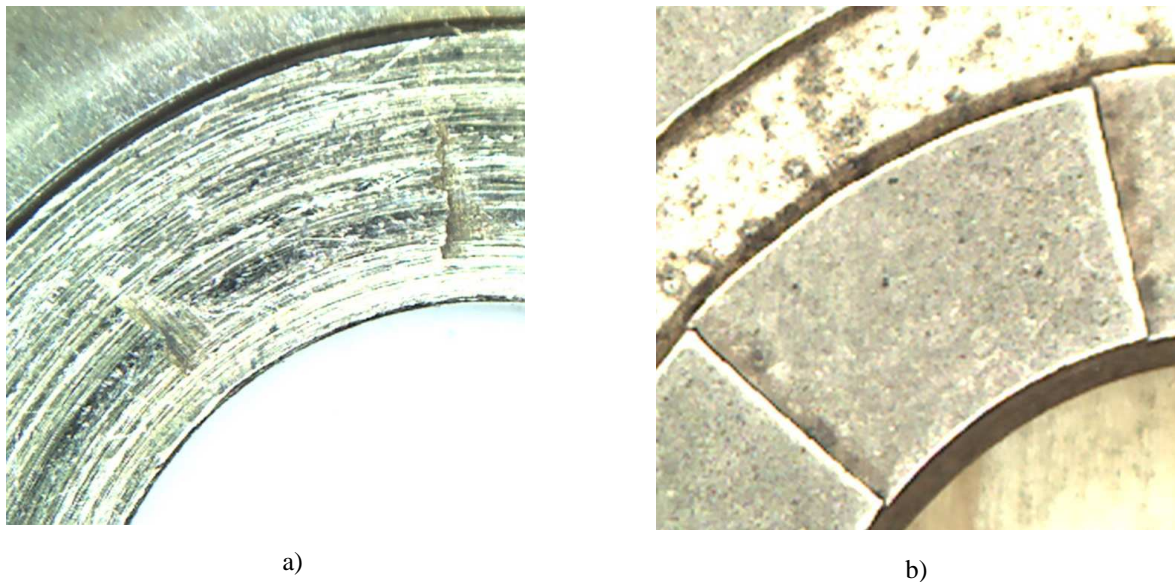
Thrust bearing disc: a) damaged area, b) new surface (magnification 10x)
